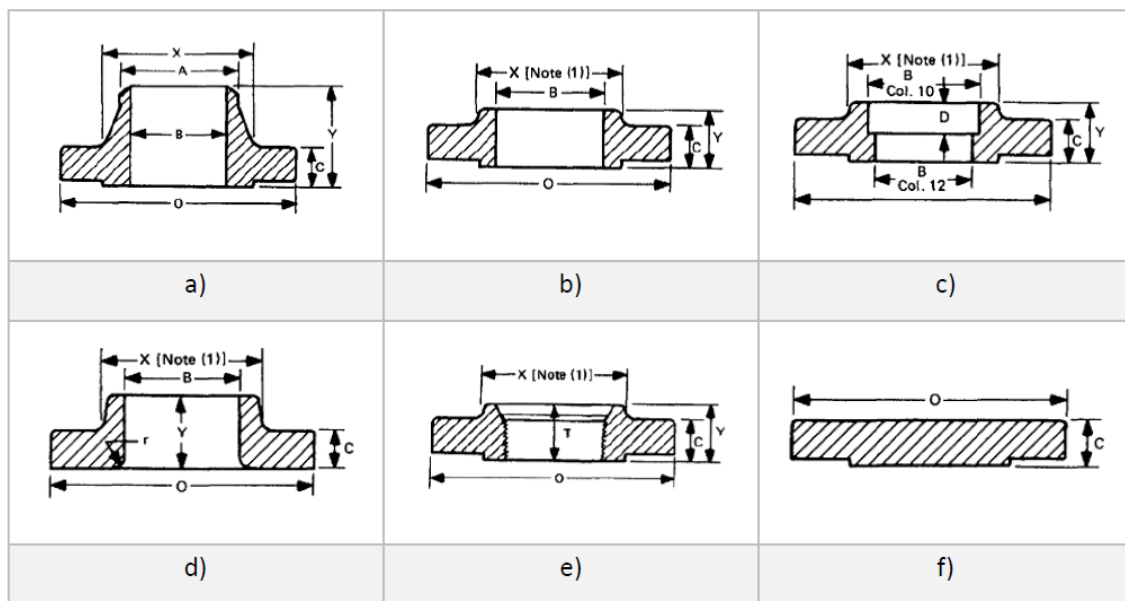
Standardized flanges in standard ASME B16.5 [Asm'13(1)] a) Welding Neck (WN) b) Slip On (SO) c) Socket Weld (SW) d) Lap (LJ) e) Threaded (TH) f) Blind (BL)
